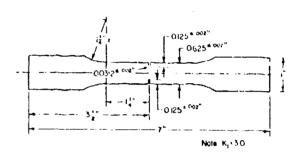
NOTCHED SHEET FATIGUE SPECIMEN
